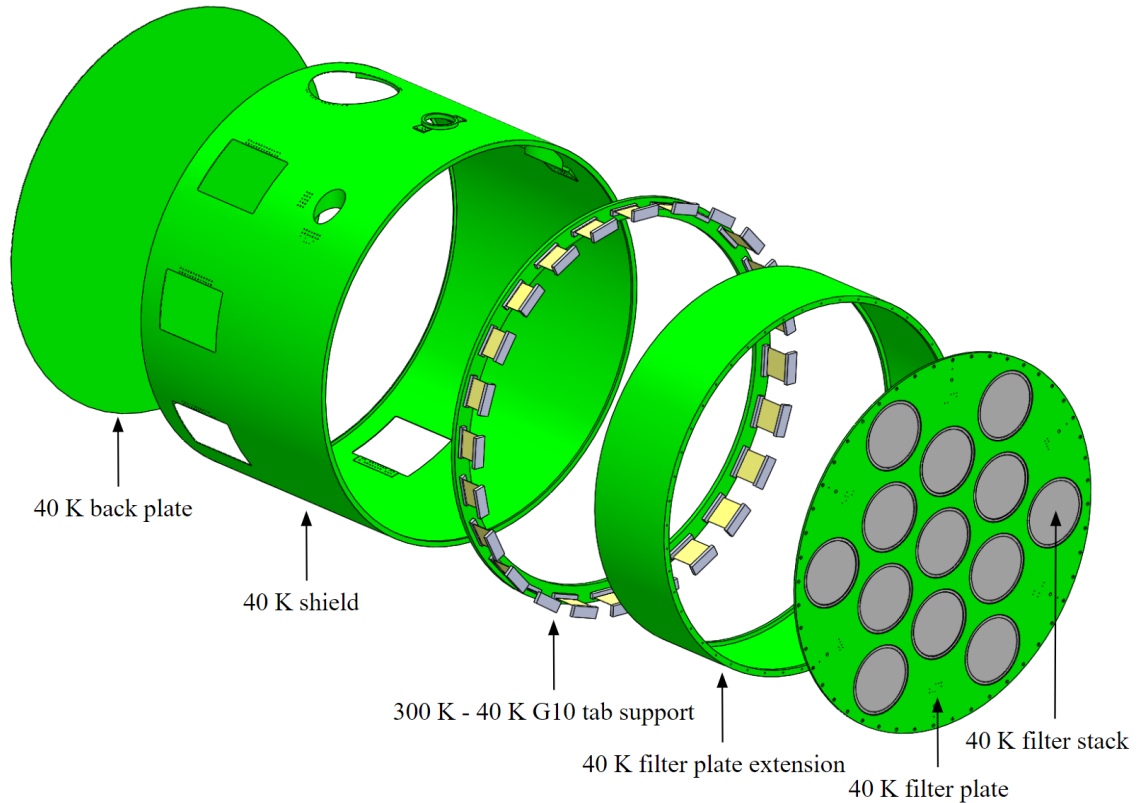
The exploded view showing the 40 K stage assembly. For scale, the 40 K stage assembly is 2.1 m in diameter and 2.0 m long. As shown, the light enters from the right and goes through the IR blocking filters mounted on the 40 K filter plate. The entirety of the 40 K stage will be covered by multi-layer insulation (not shown in the model).
